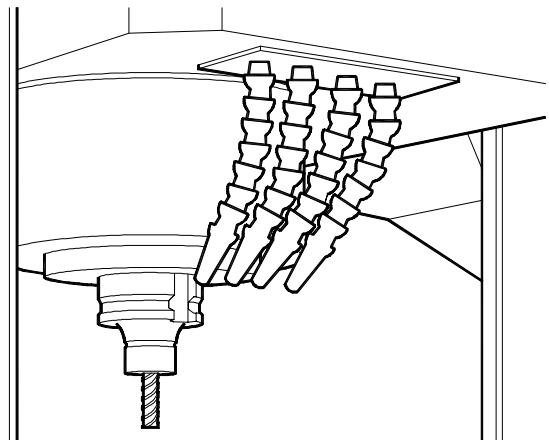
EXTERNAL NOZZLE COOLANT
